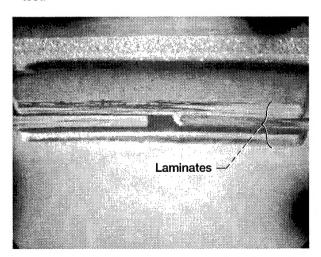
Magnified view of upstream finger pad i.d. of pressure balanced finger seal after endurance test.
